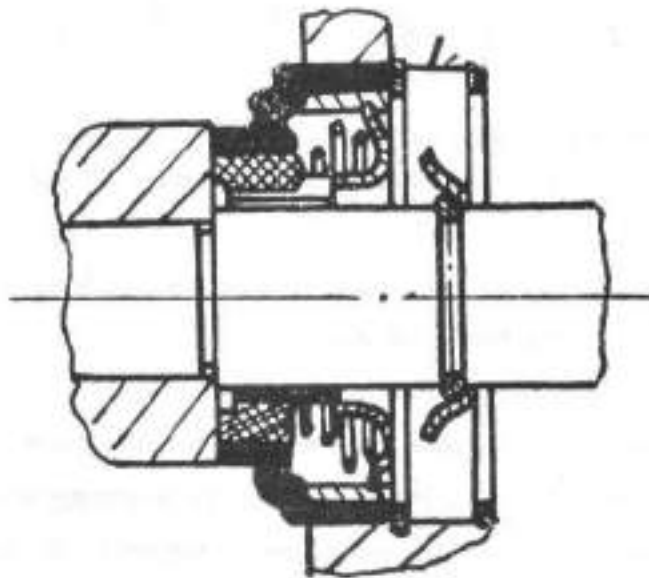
23. WATER PUMP SHAFT SEALING GLAND (VERSION).
